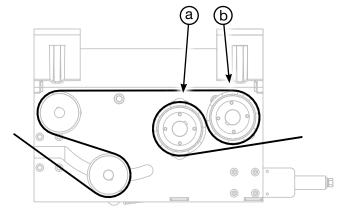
Drive box, pinch roller (a) & drive roller (b)
